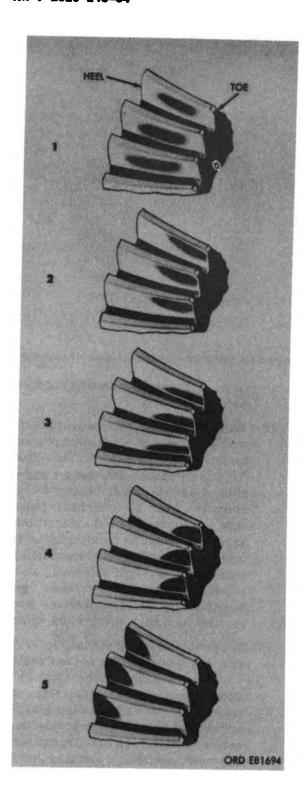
Correct and incorrect areas on drive side of the gear teeth.
